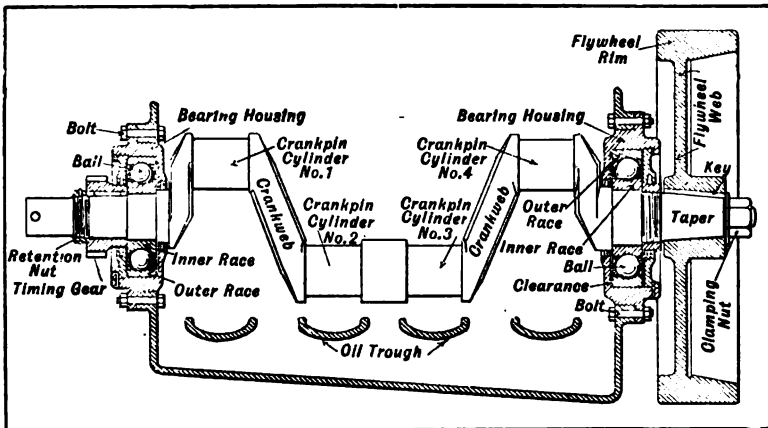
Design of four-cylinder crankshaft mounted on two annular ball-bearings.
